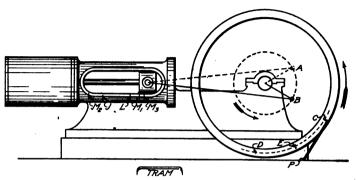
Sketch of Engine, Showing Method of Putting Engine on Center
